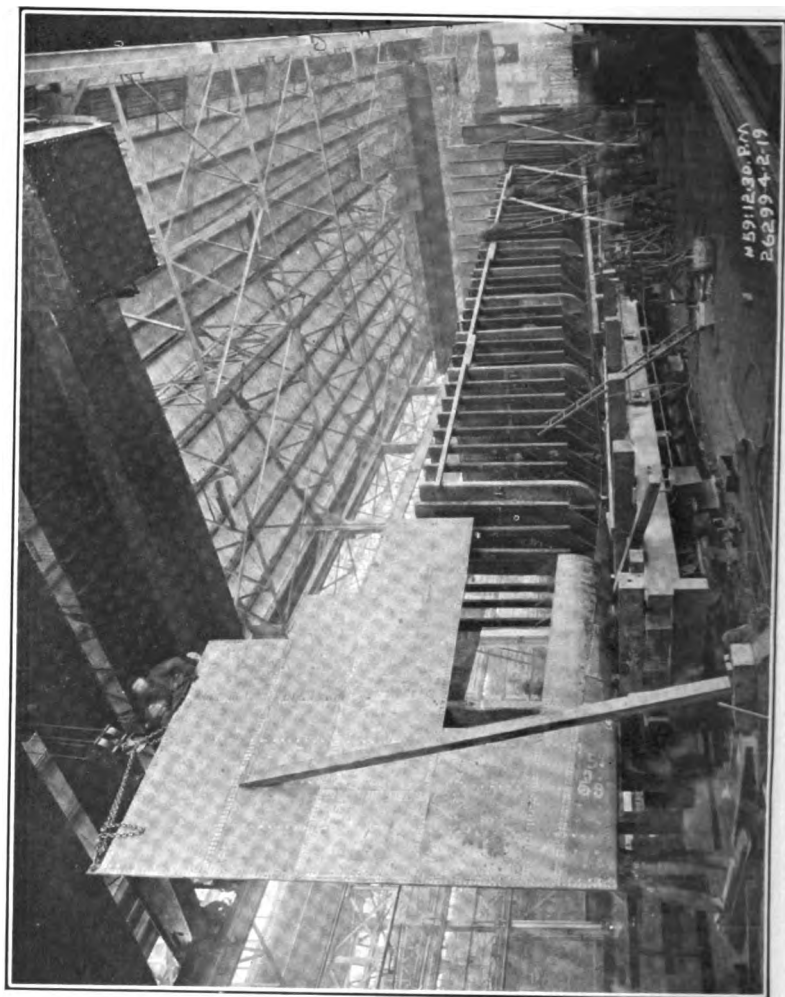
PLATE I.—HULL UNDER CONSTRUCTION IN ASSEMBLY BUILDING, SHOWING TRUCKS.
